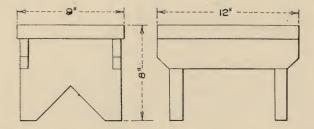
End and side views of heavy stool—Scale 1½ in. to the foot
